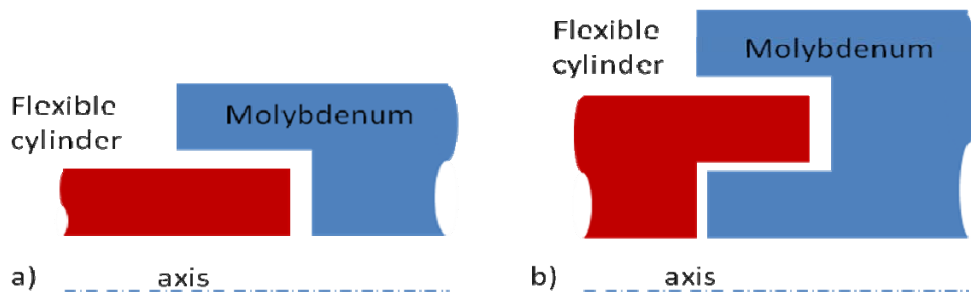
Possible joint designs between molybdenum and a flexible cylinder: a) locking outside diameter of the flexible cylinder; b) locking both inside and outside diameters of the flexible cylinder.
